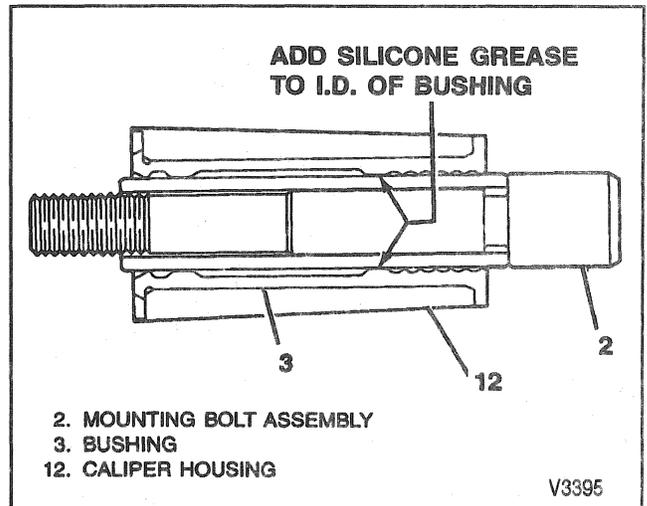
Mounting Bolt Lubrication (Delco 3486)
